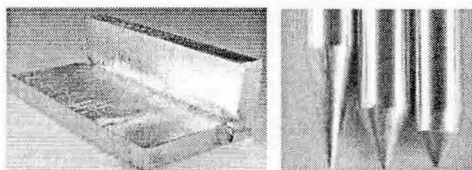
Specimen and electrode tip for fillet TIG welding
